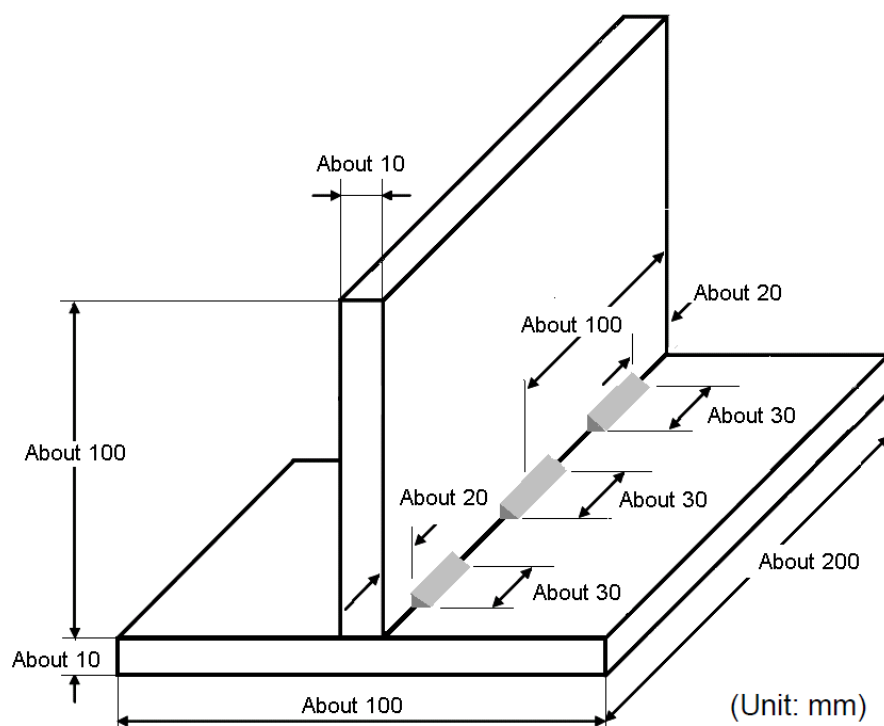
Dimensions and types of test assembly for tack fillet welds
